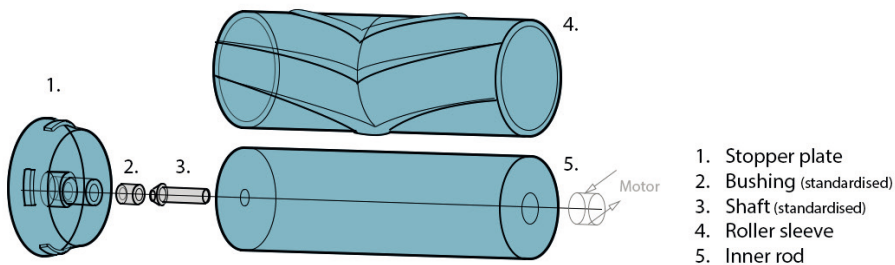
Exploded view of the primary design concept (additive manufacturing). Printed components are shaded blue and standardised components are light grey.
